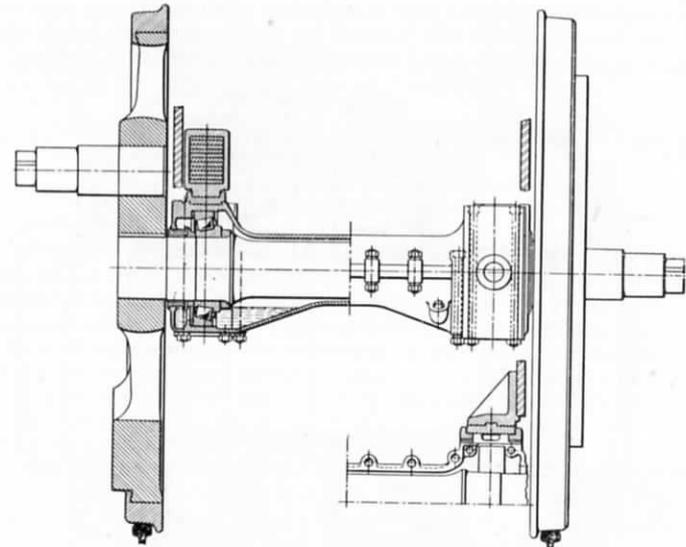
TIMKEN "CANNON" TYPE AXLEBOX FOR LOCOMOTIVE DRIVING AXLES. SINGLE TAPERED ROLLER BEARING MOUNTED ON EACH JOURNAL, HOUSED IN TUBULAR-TYPE AXLEBOX, EMBRACING THE ENTIRE AXLE BETWEEN WHEEL HUBS.
